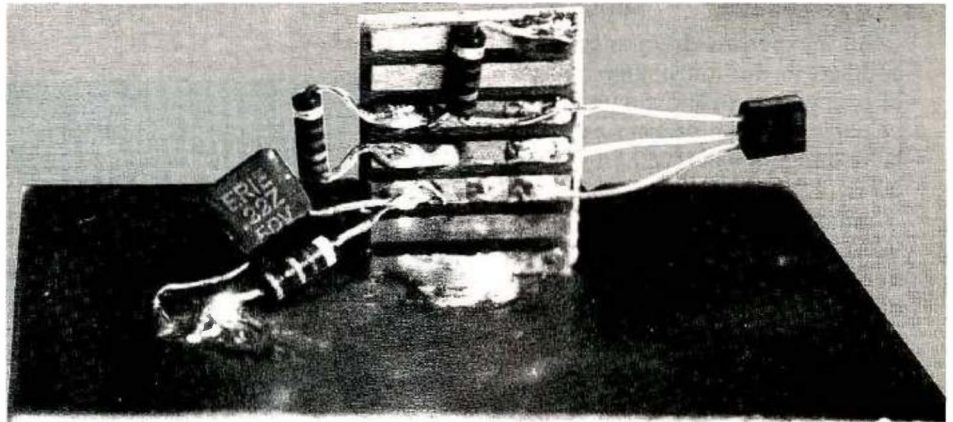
Finally install the components. In this example, a one-transistor amplifier is shown mounted on a single tie strip.
